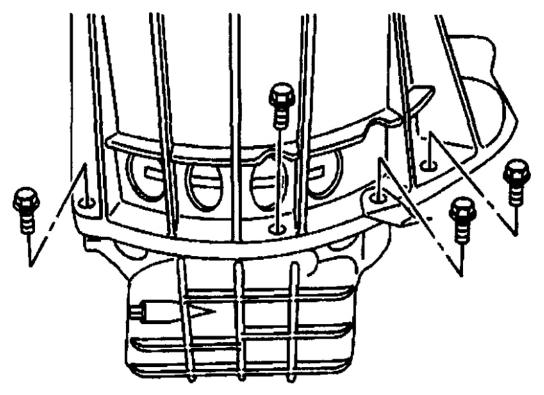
View Of Access Plugs For Oil Pan Rear Nuts Courtesy of GENERAL MOTORS CORP.
